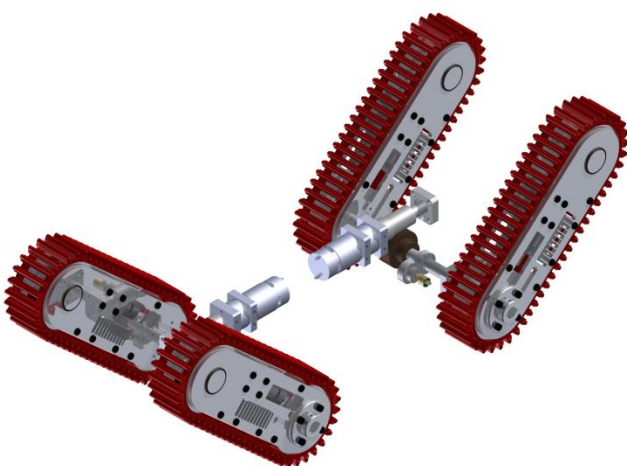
New Drive Train Consisting of Two Sets of Flippers and Tracks with Enclosed Motors
